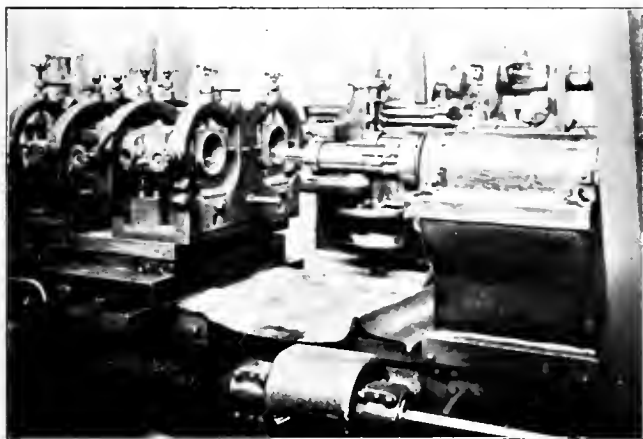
Lathe Fixture for Holding Four Cylinders while They are being Rough Bored
